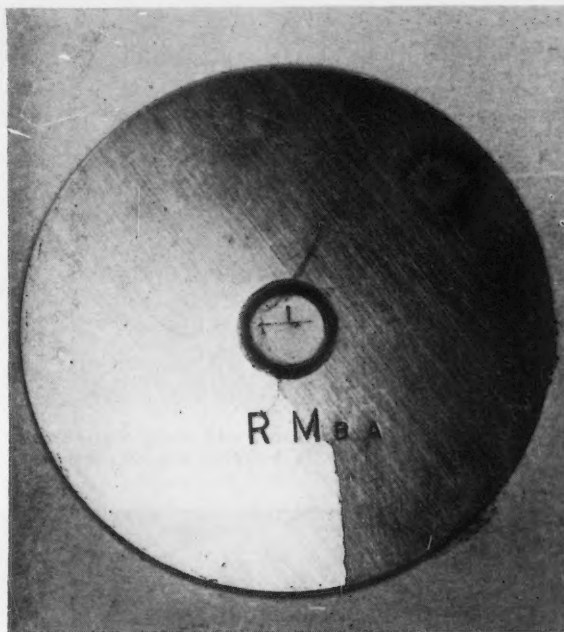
Part of screw conveyor of Case 13 showing cracks. $\frac{1}{2}$ X.
